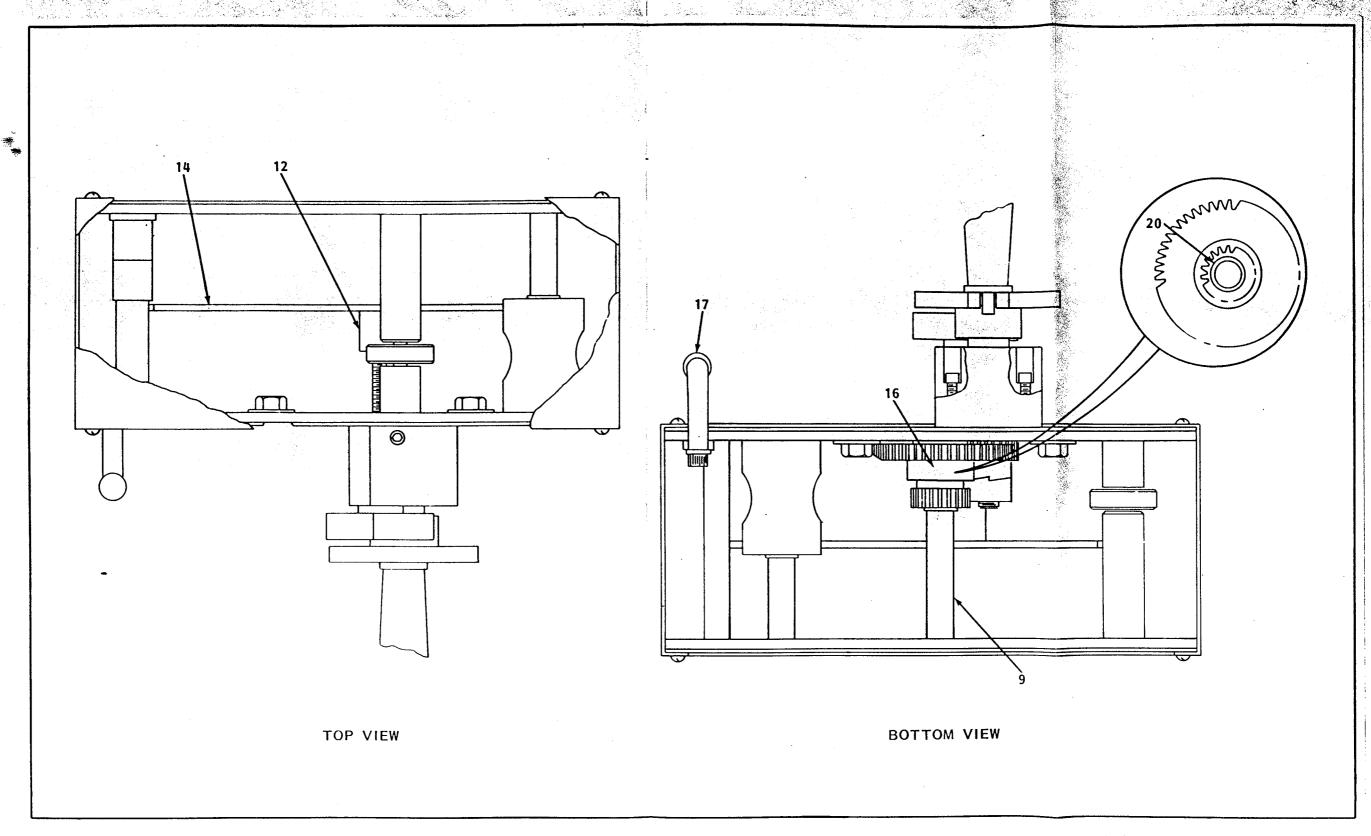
Gear Box Assembly (500023) Location of Components (Sheet 2 of 2)
